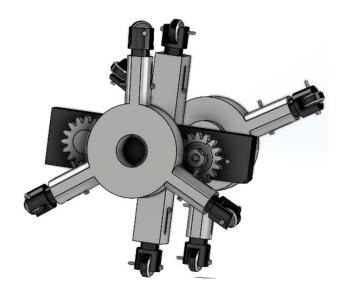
Pipe Traversing Rover (Solidworks Design) II. <u>CONFIGURATION OF ROVER</u>
